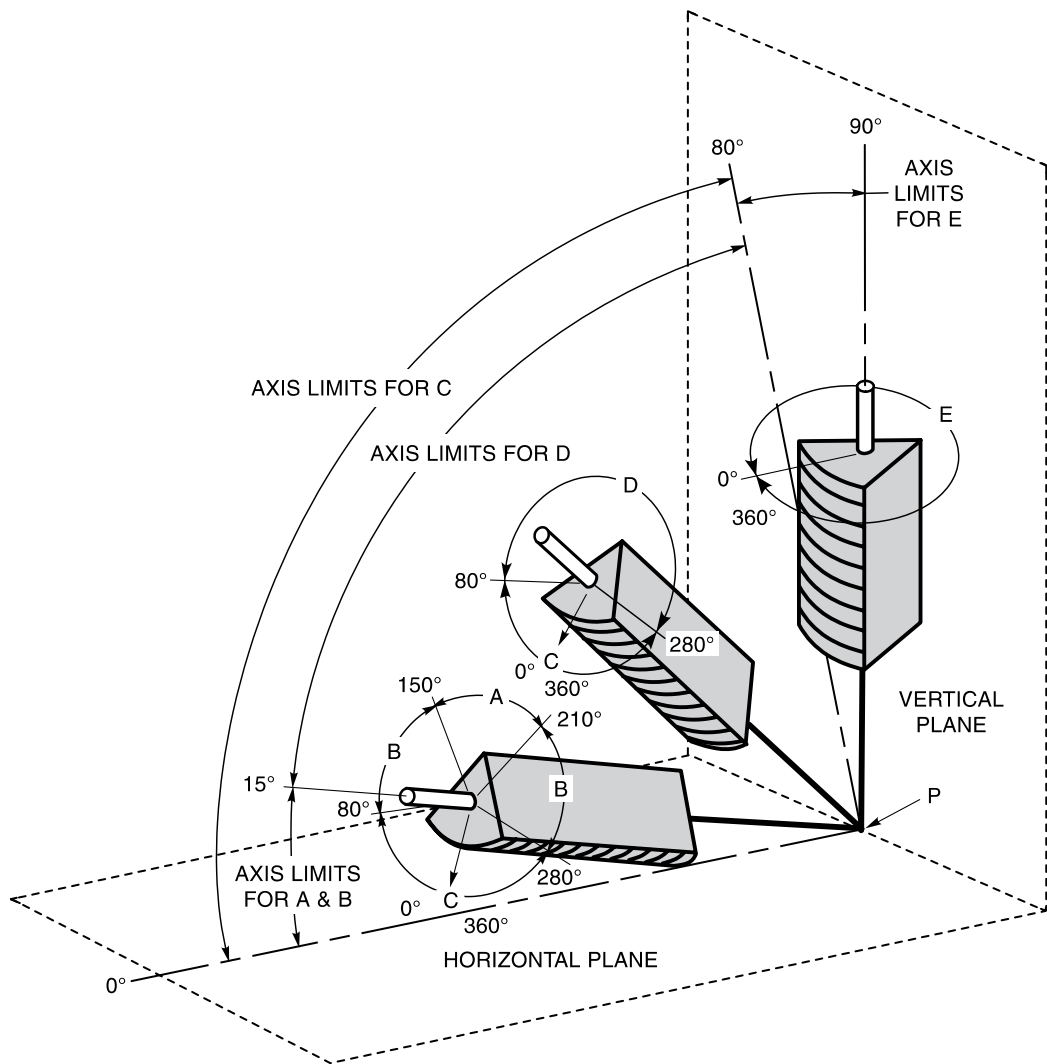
Direct Butt Joint Test Positions for Groove Welds (see 8.2.3)
